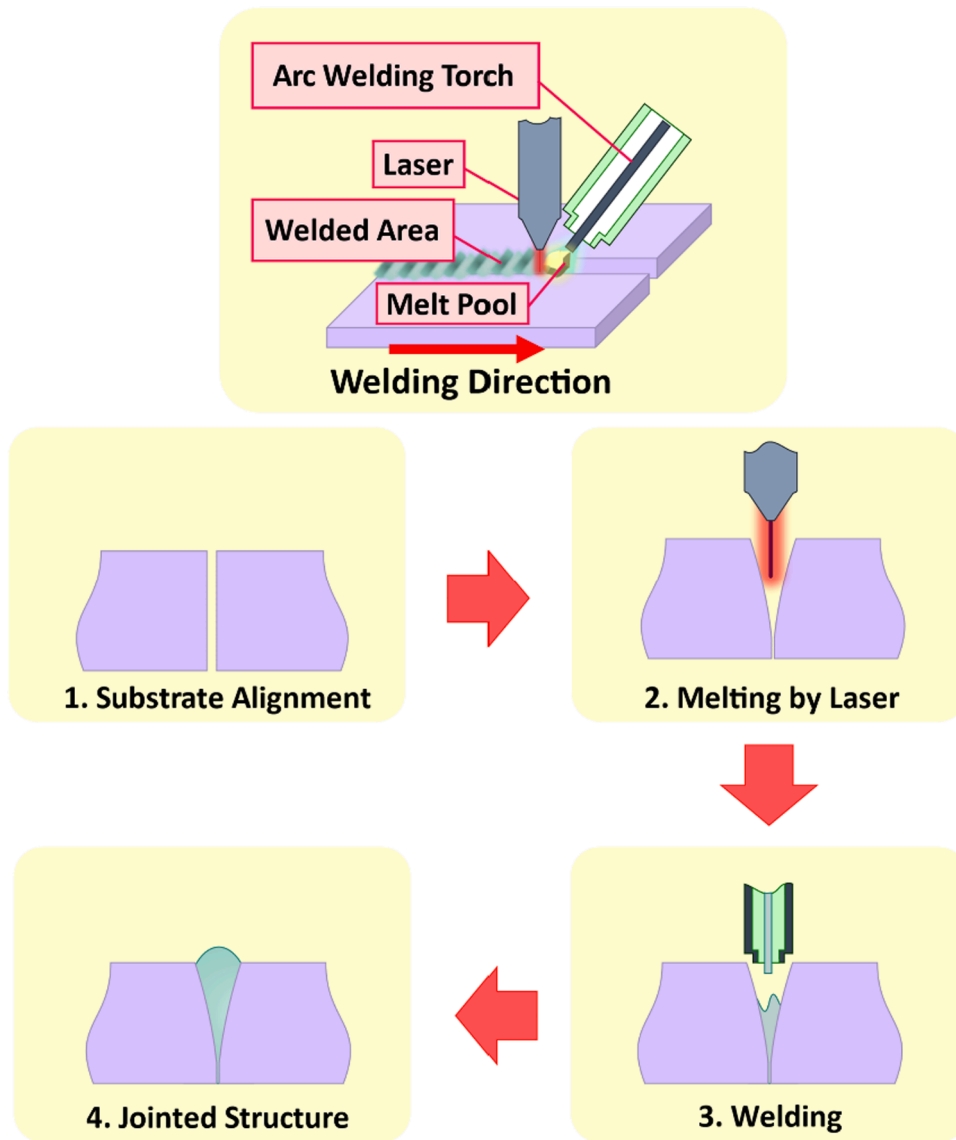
Joining process of hybrid laser-weld joints.
